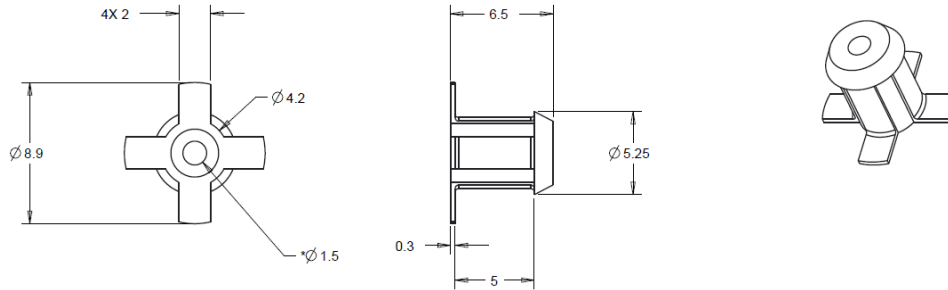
GEN1A/GEN2A Integrated Isolator Design [mm]
